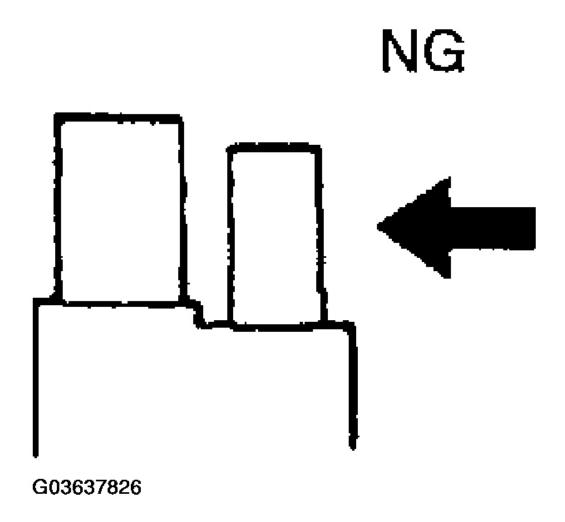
Assembling Fuel Hose Assembly Courtesy of MAZDA MOTORS CORP.
